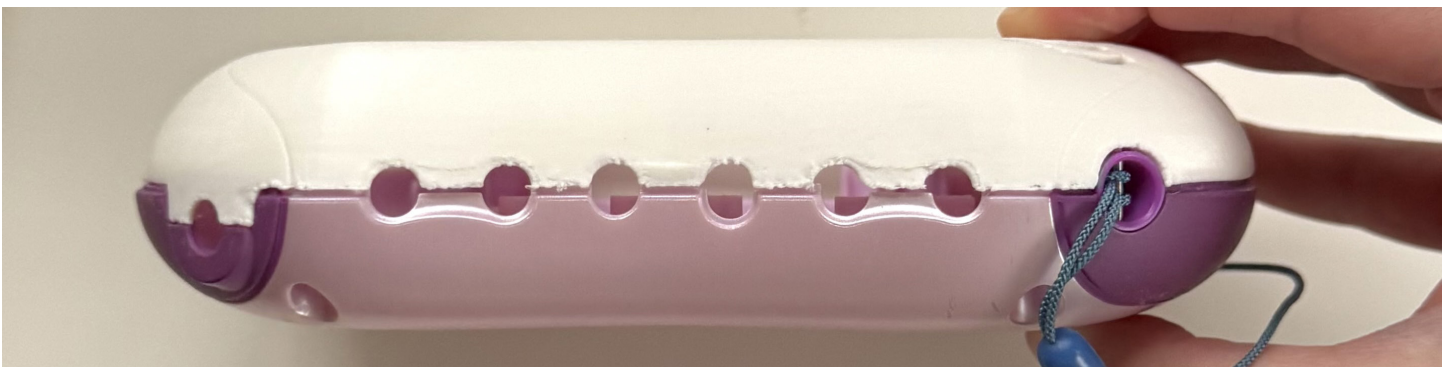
Bottom view of final 3D print, improved button hole line up. Source: Author
